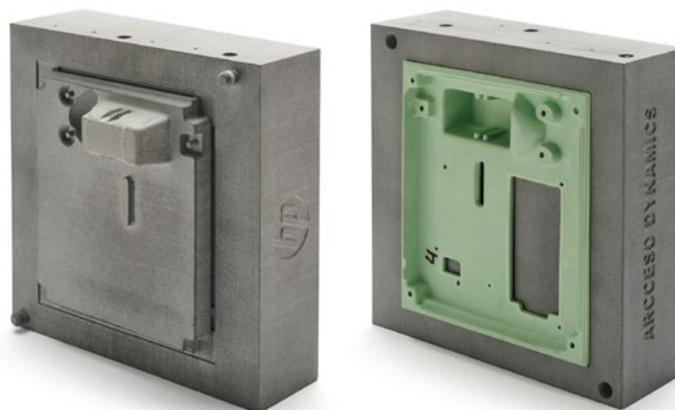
Reaction Injection Mold printed with HP Jet Fusion 3D 4200 and HP 3D HR PA 12
